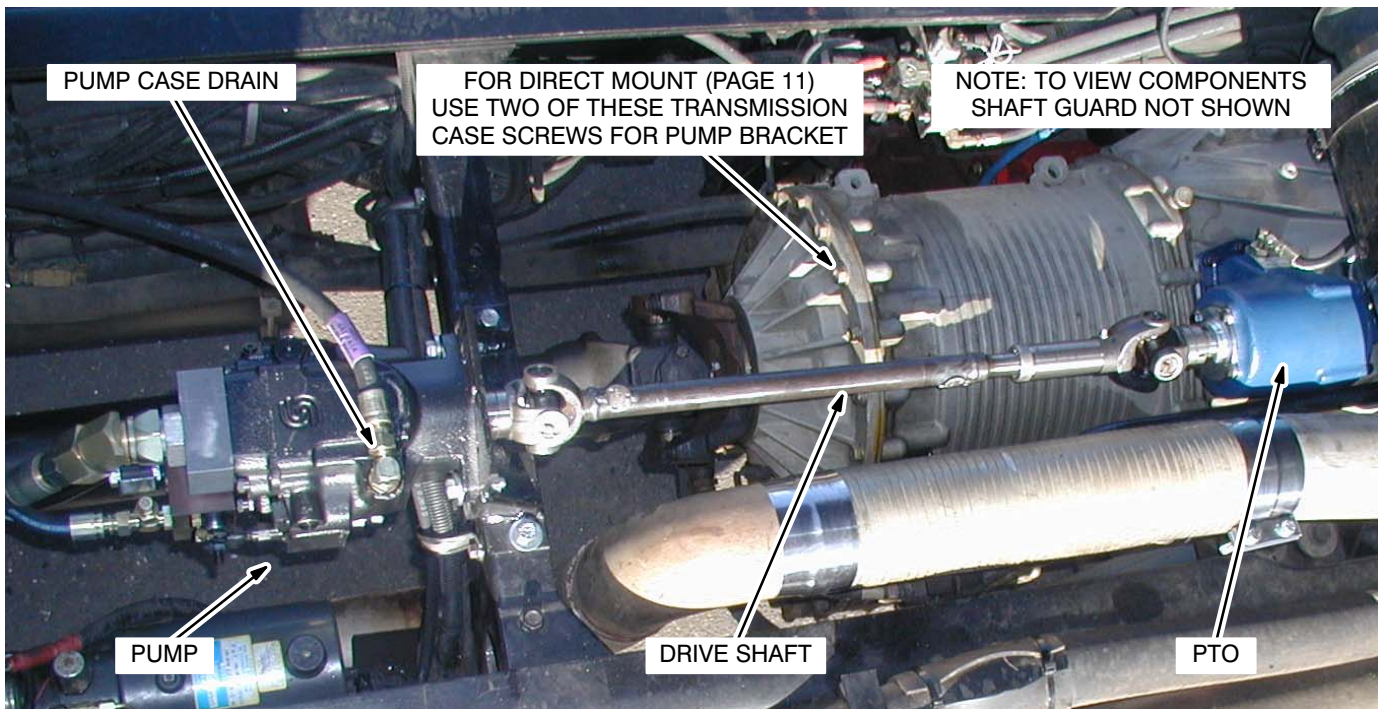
TYPICAL ARRANGEMENT OF PTO, HYDRAULIC PUMP, DRIVE SHAFT AND CASE DRAIN
